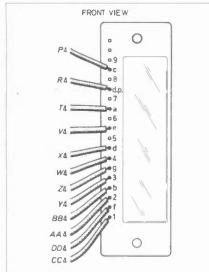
Additional wiring data for the alternative Bowmar 9-digit l.e.d. display. This display will need to be screw mounted to the front panel.
